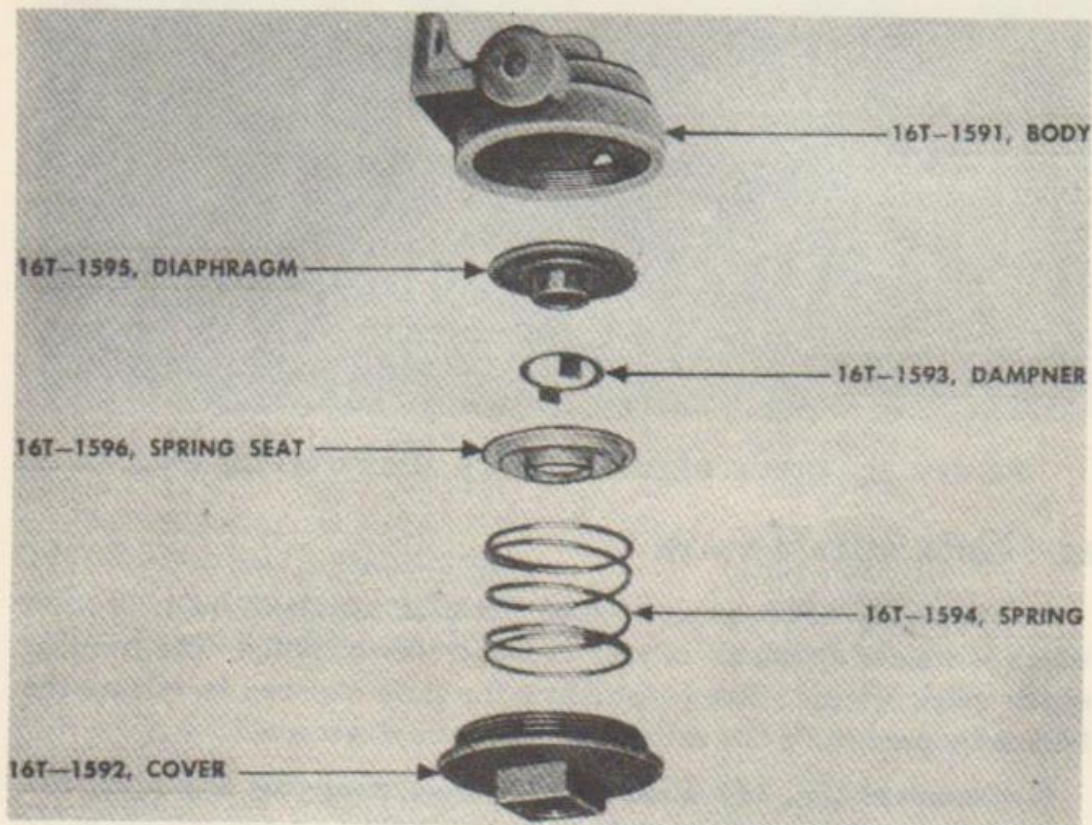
QUICK RELEASE VALVE—EXPLODED VIEW
